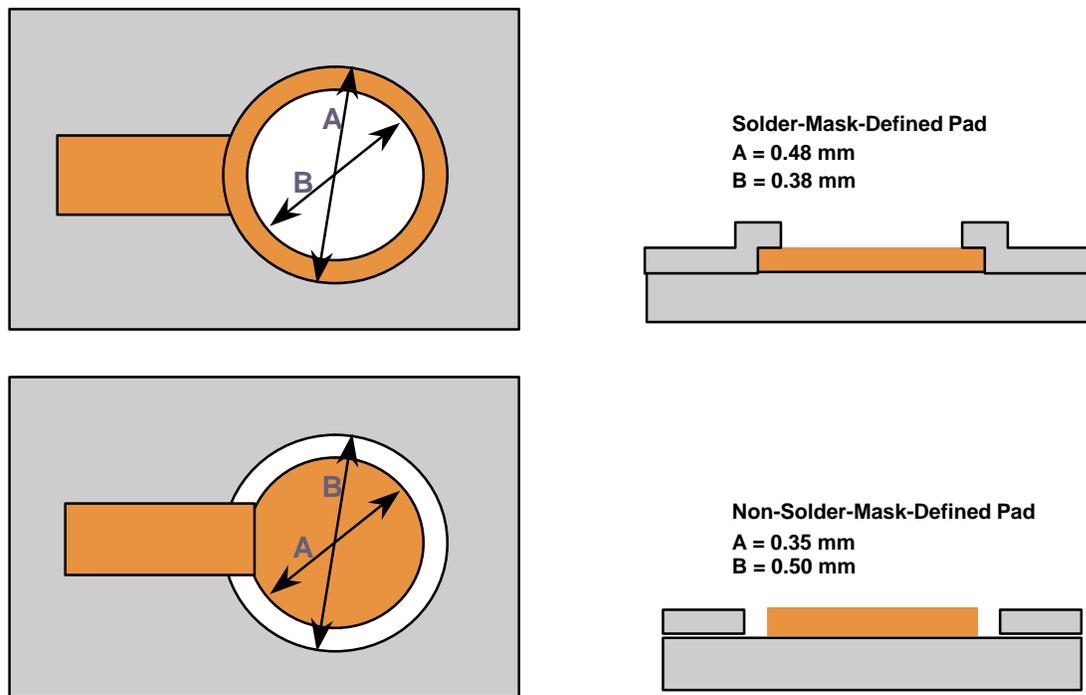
Land-Pad Dimensions for 114-Ball BGA Package
